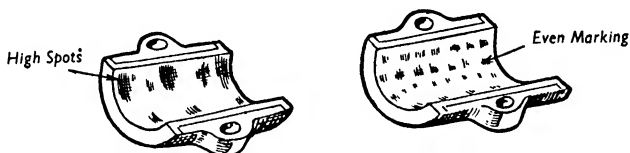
MARKING OBTAINED BEFORE AND AFTER SCRAPING
